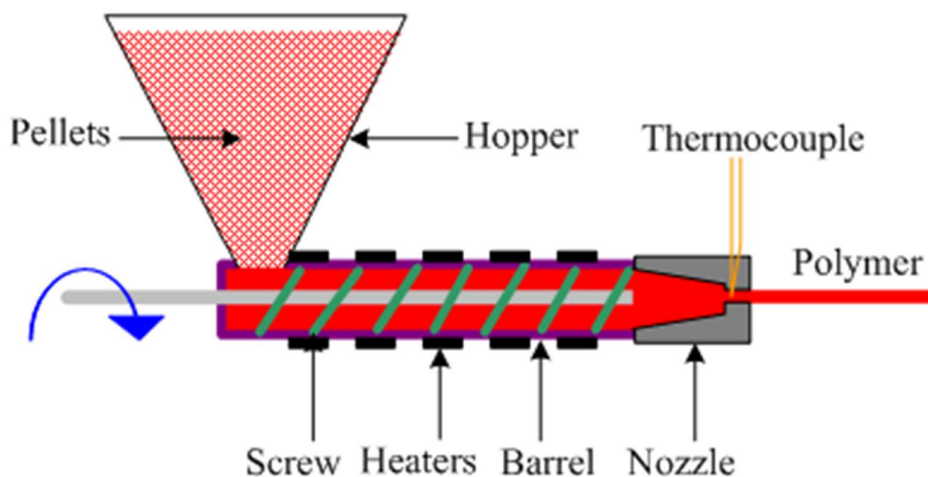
Schematic of typical screw-injection molding machine [140]
